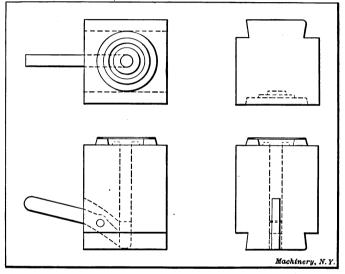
Upsetting Die for the Second Operation in Forging the Cam-shaft
